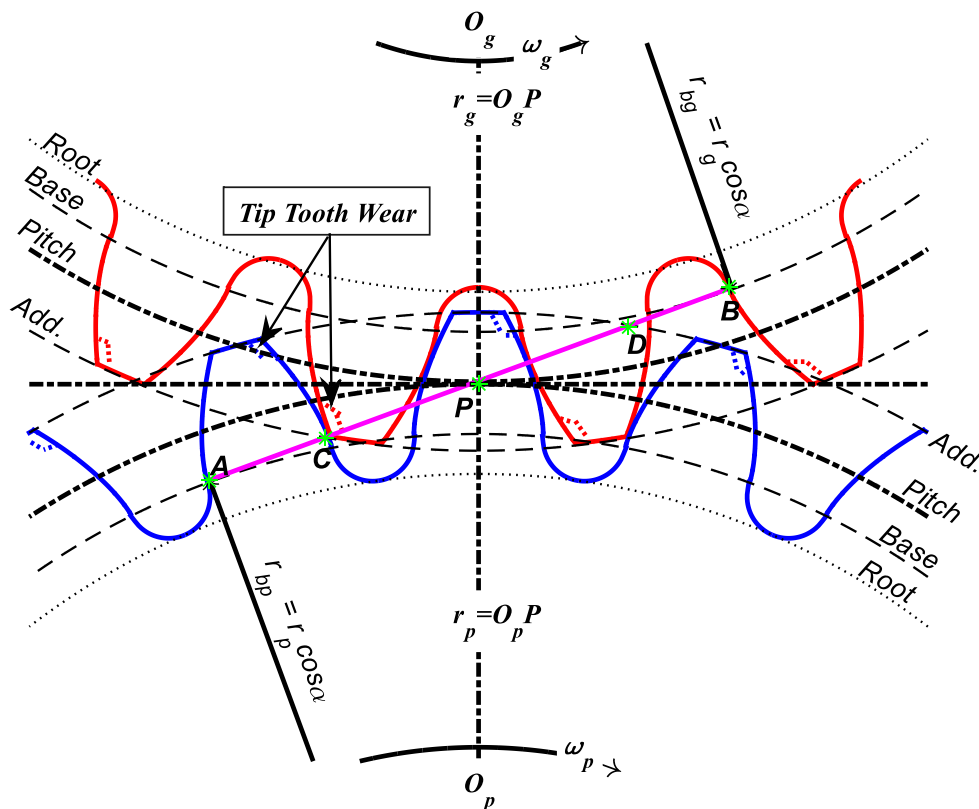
Gear meshing process of a single cross-sectional plane of helical gears with tooth wear
